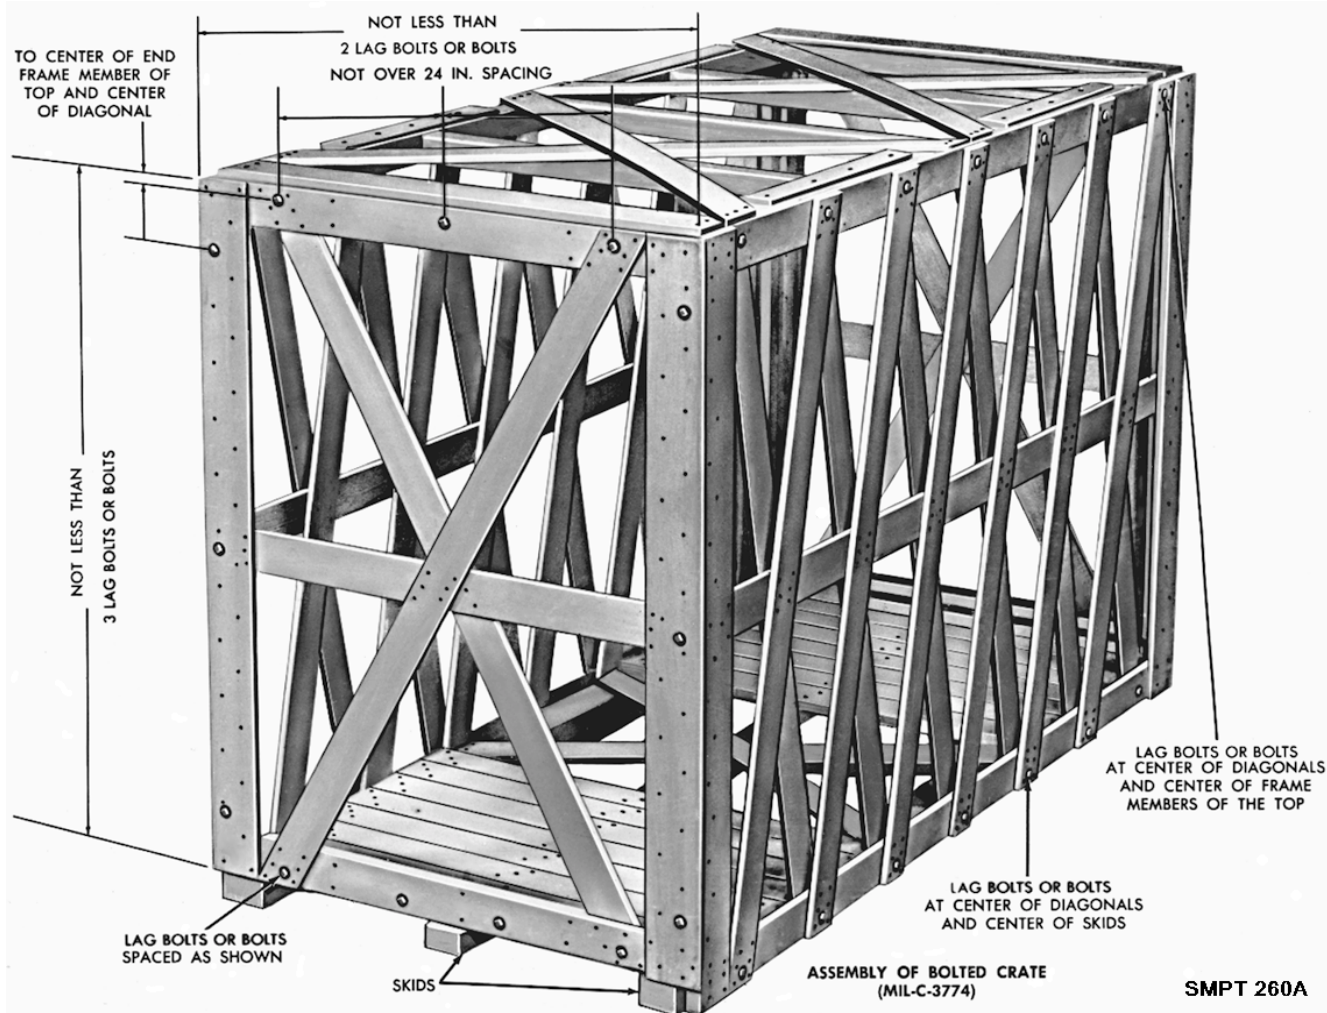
Assembly of open bolted crate (MIL-C-3774).
